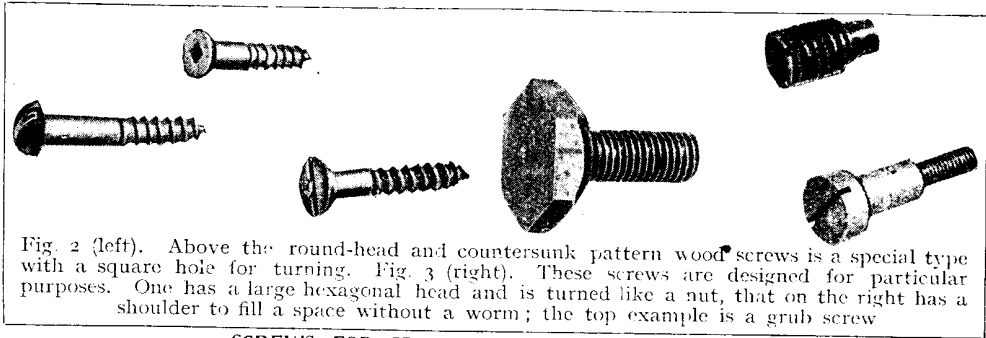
(left). Above the round-head and countersunk pattern wood screws is a special type with a square hole for turning. Fig. 3 (right). These screws are designed for particular purposes. One has a large hexagonal head and is turned like a nut, that on the right has a shoulder to fill a space without a worm; the top example is a grub screw
